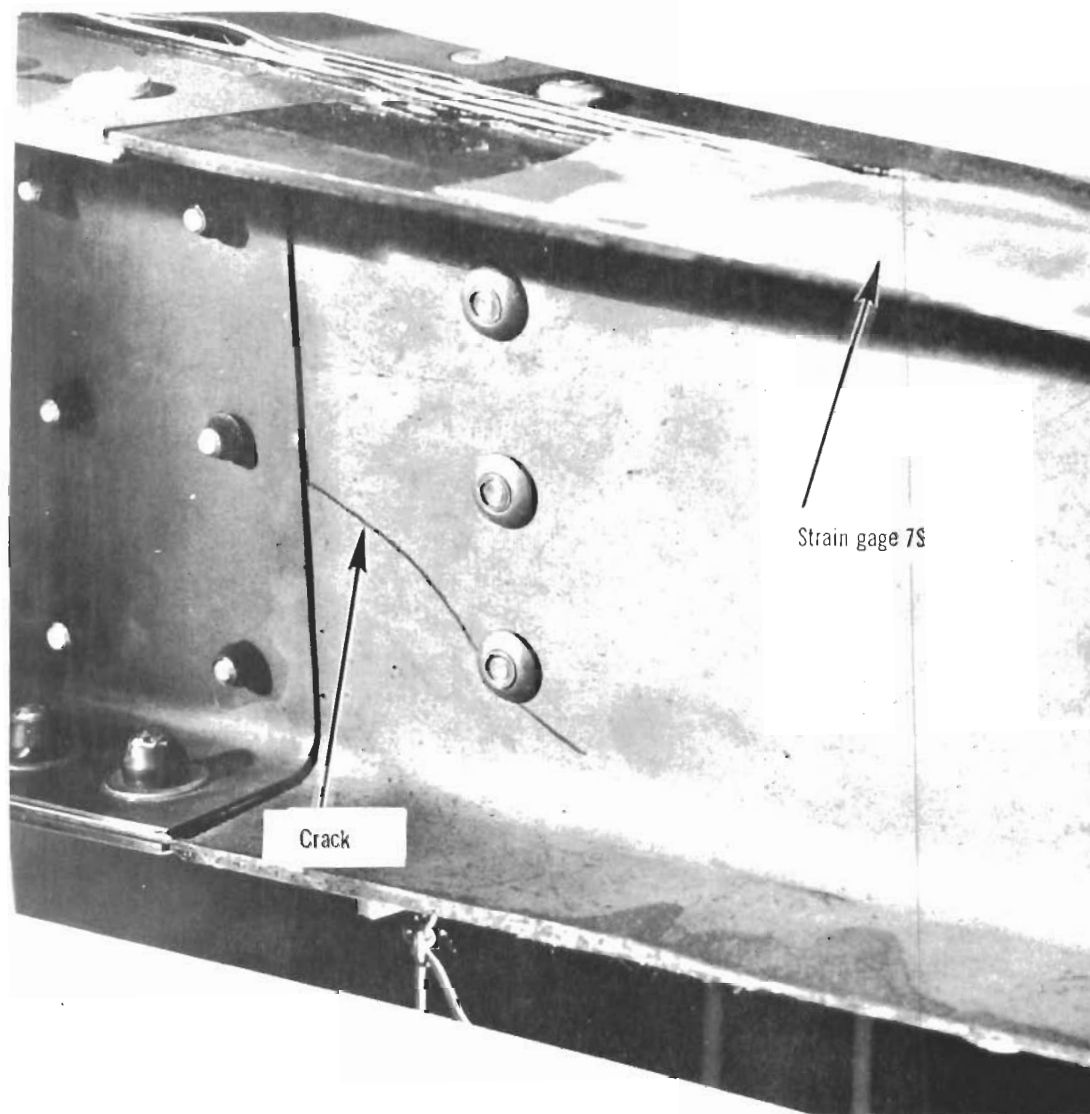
Crack in Trailing Edge Lower Closure Rib of Beryllium Rudder
